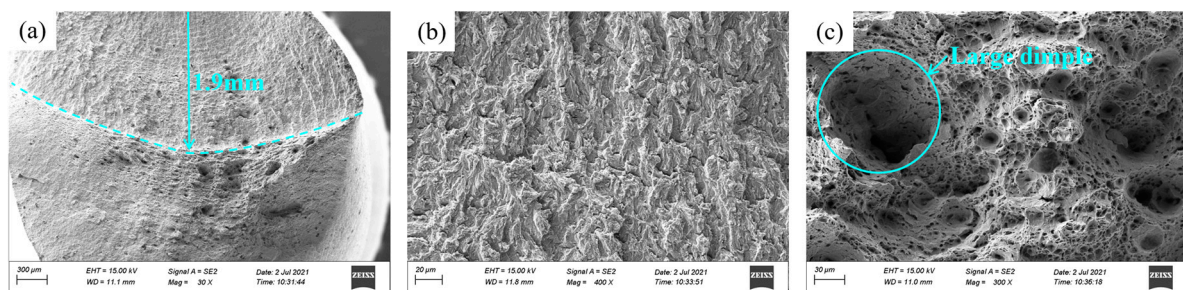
Fatigue fracture morphology of specimen under the maximum stress of 500 MPa (a) macroscopic morphology; (b) II zone; (c) III zone.
